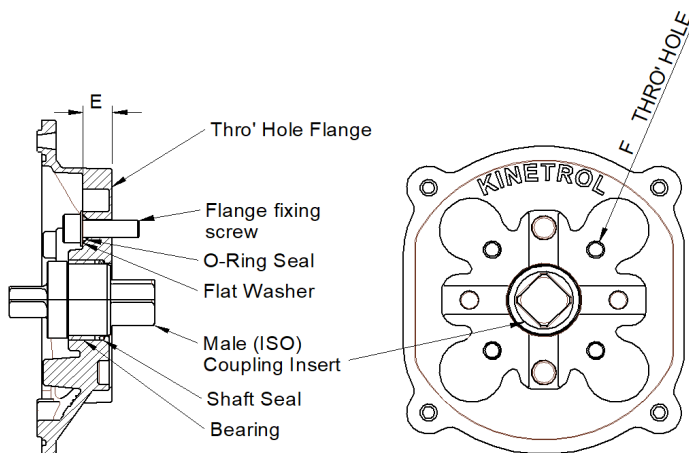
shows the ISO5211 compliant Flange option with clearance holes.
